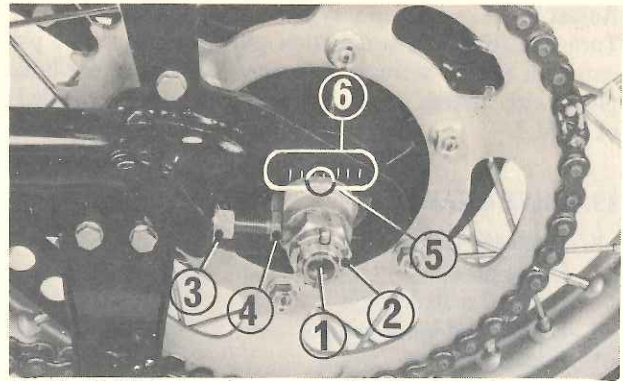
(1) Cotter pin (2) Rear axle nut (3) Lock nut (4) Adjusting bolt (5) Index mark (6) Reference marks
